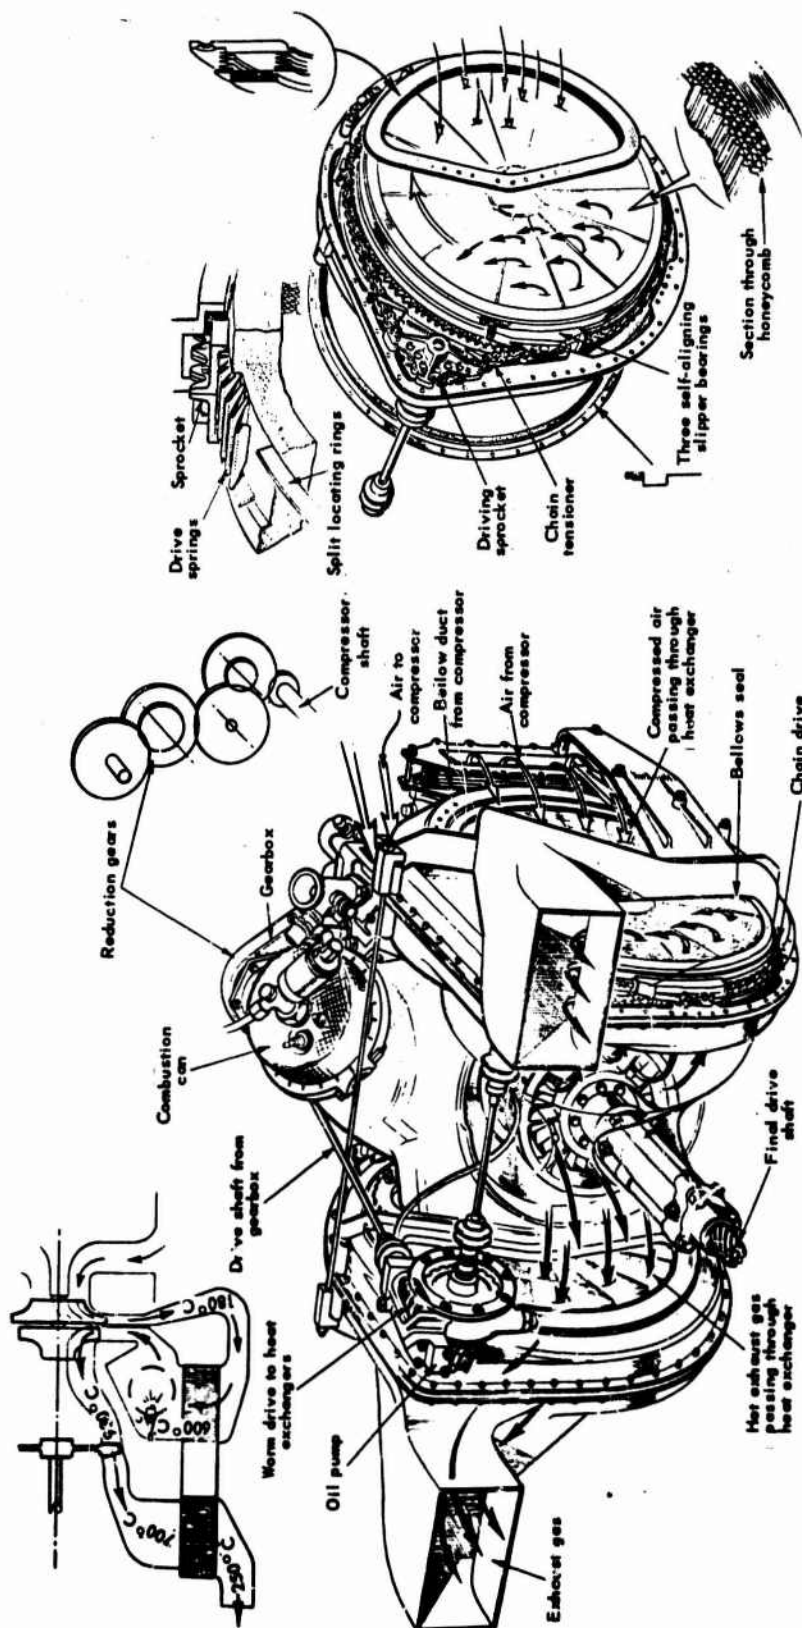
Cutaway View of Rover 25/150R Automotive Gas-Turbine Engine, Showing Vertically Mounted, Rotary Ceramic Disk-Type Heat Exchanger, and Air-Flow Paths
